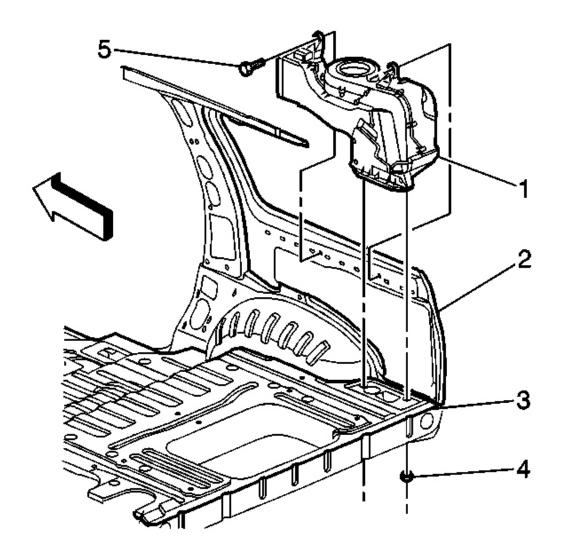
Removing/Installing Rear Ducting Courtesy of GENERAL MOTORS CORP.
